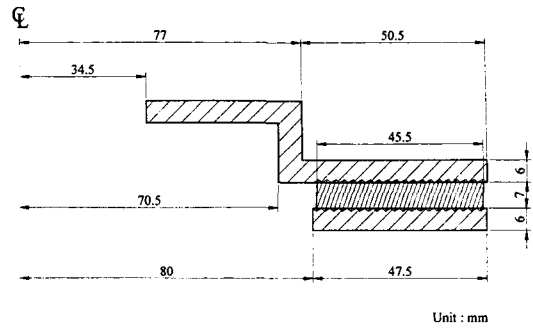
(c) Cross section of ventilated brake disc having helical grooved vents
